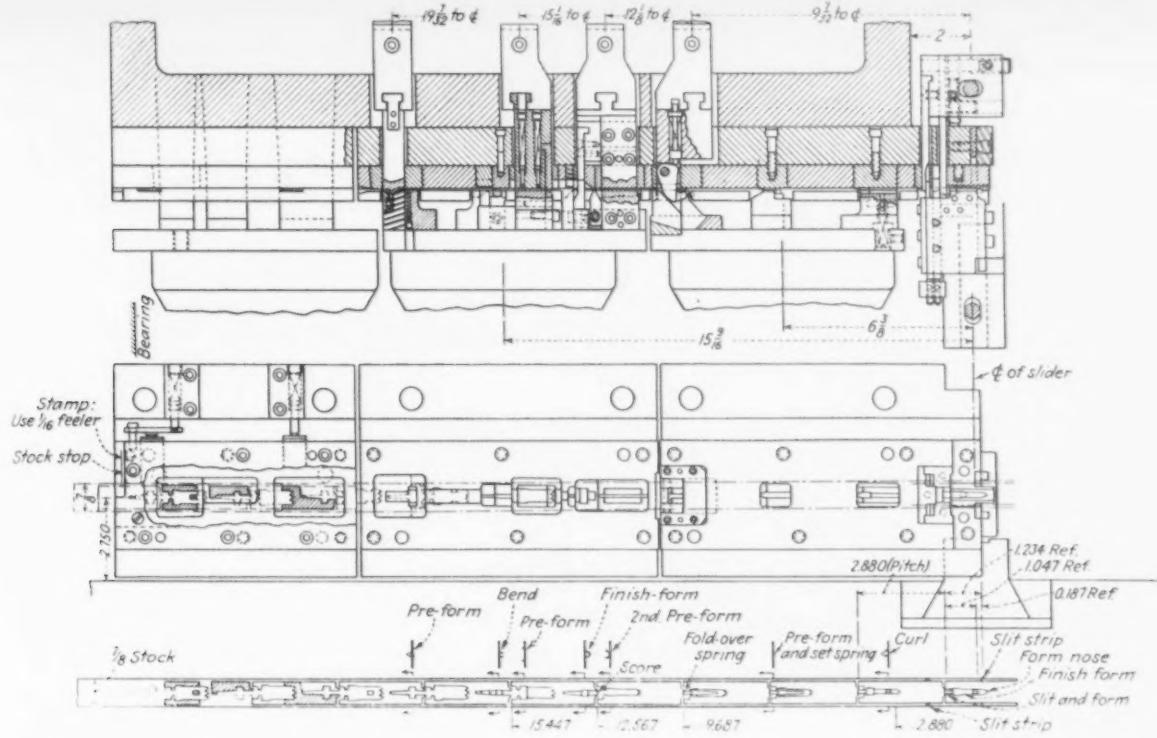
This assembly drawing of the die that produces the larger brass plug shows the strip (bottom) in successive stages and the latch (top) that folds the formed prong down into the partly formed outer tube of the plug.
